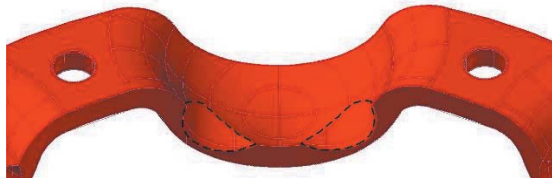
Design for the diagonally recessed cage with two small chamfers
